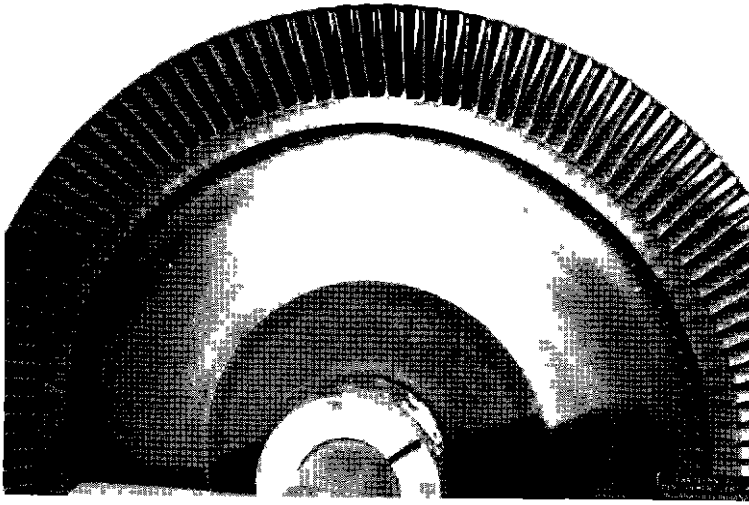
Damage to Turbine Wheel Blades From Ingesting Fuel into the Air Inlet of a J35-A-13D Engine While Operating at a Throttle Setting for 100 Per Cent (7,759 rpm)
